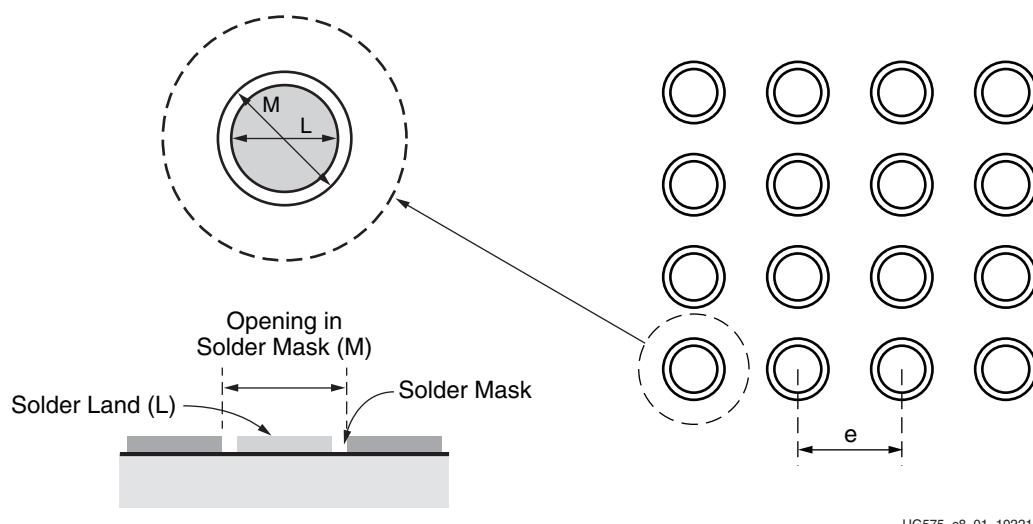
Suggested Board Layout of Soldered Pads for BGA Packages
